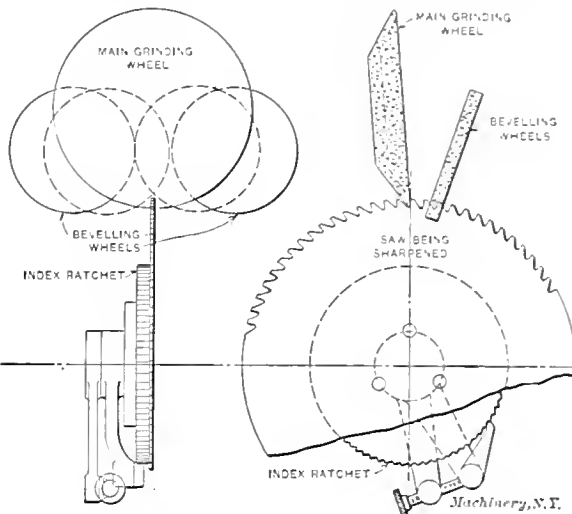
Arrangement of the Grinding Wheels and the Saw to be Sharpened
